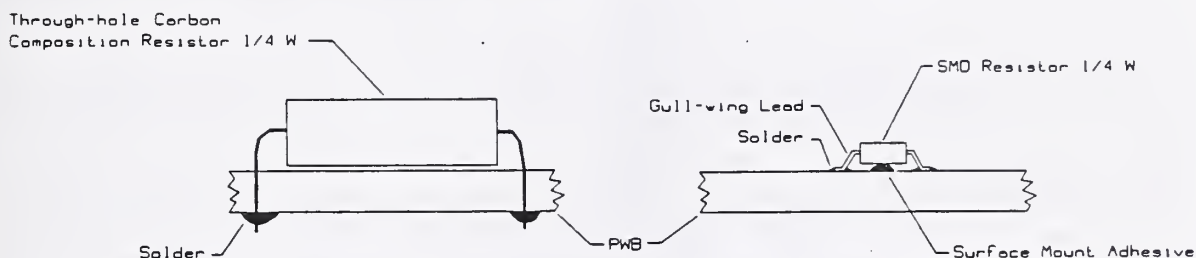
Through-hole and Surface Mount Assemblies. SMDs are mounted directly to the surface of a printed wiring board (PWB) rather than inserting component leads through a PWB as in through-hole design.
